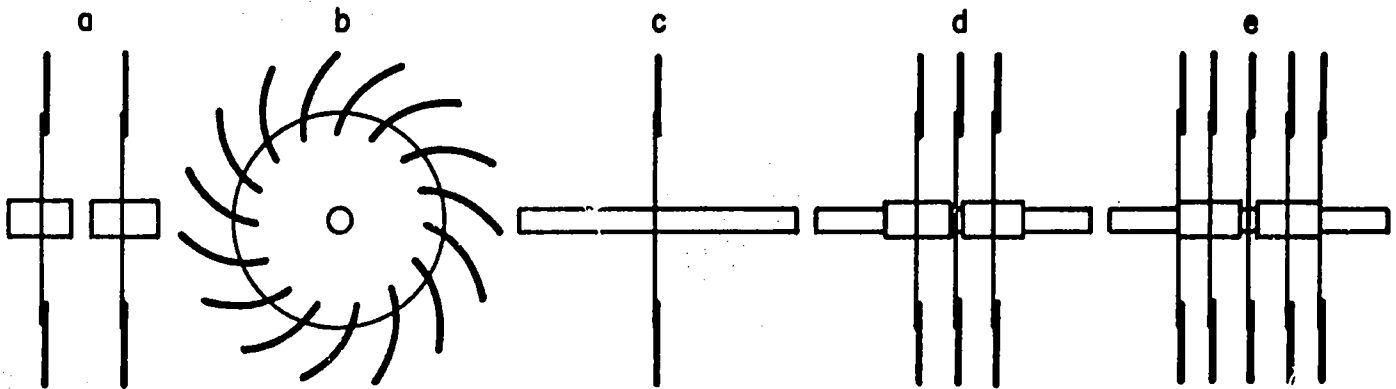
The rotary hoe assembly, including, a) the free rotating rotary blade, b) the rotary hoe blade, c) the central fixed rotary blade, d) the free rotating rotary blades position on either side of the fixed blade, and 3) the rotary hoe assembly.
